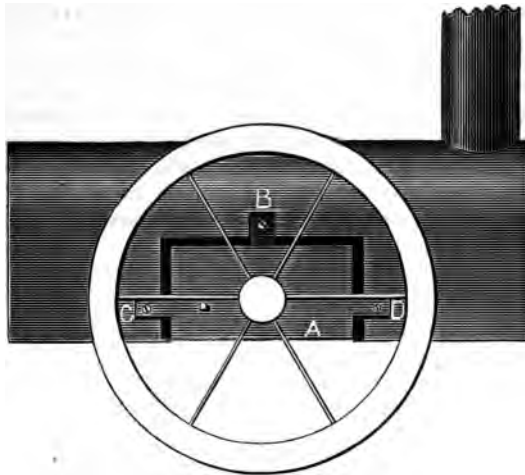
SIDE VIEW OF WOODEN BOILER.
